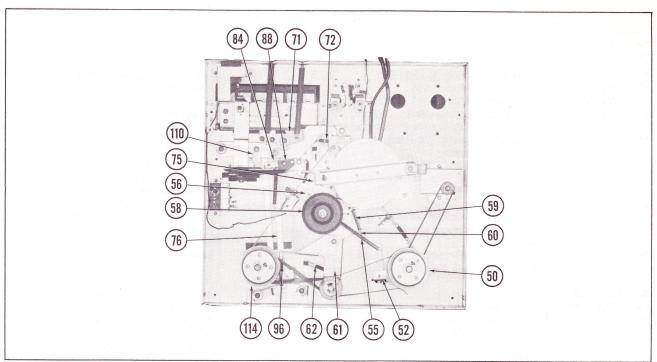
BOTTOM VIEW OF MECHANISM WITH MOTOR ASSEMBLY REMOVED
